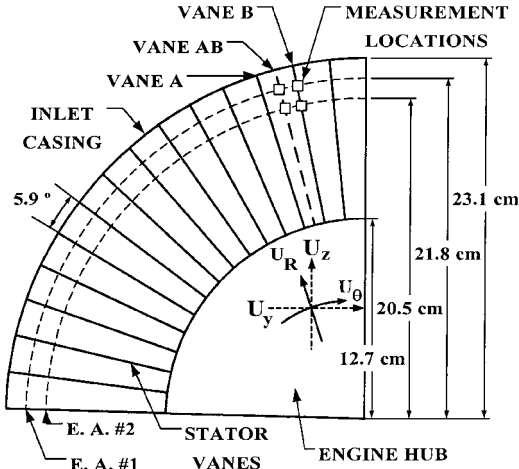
Front view of F109 stator-vane row, with measurement locations shown.
